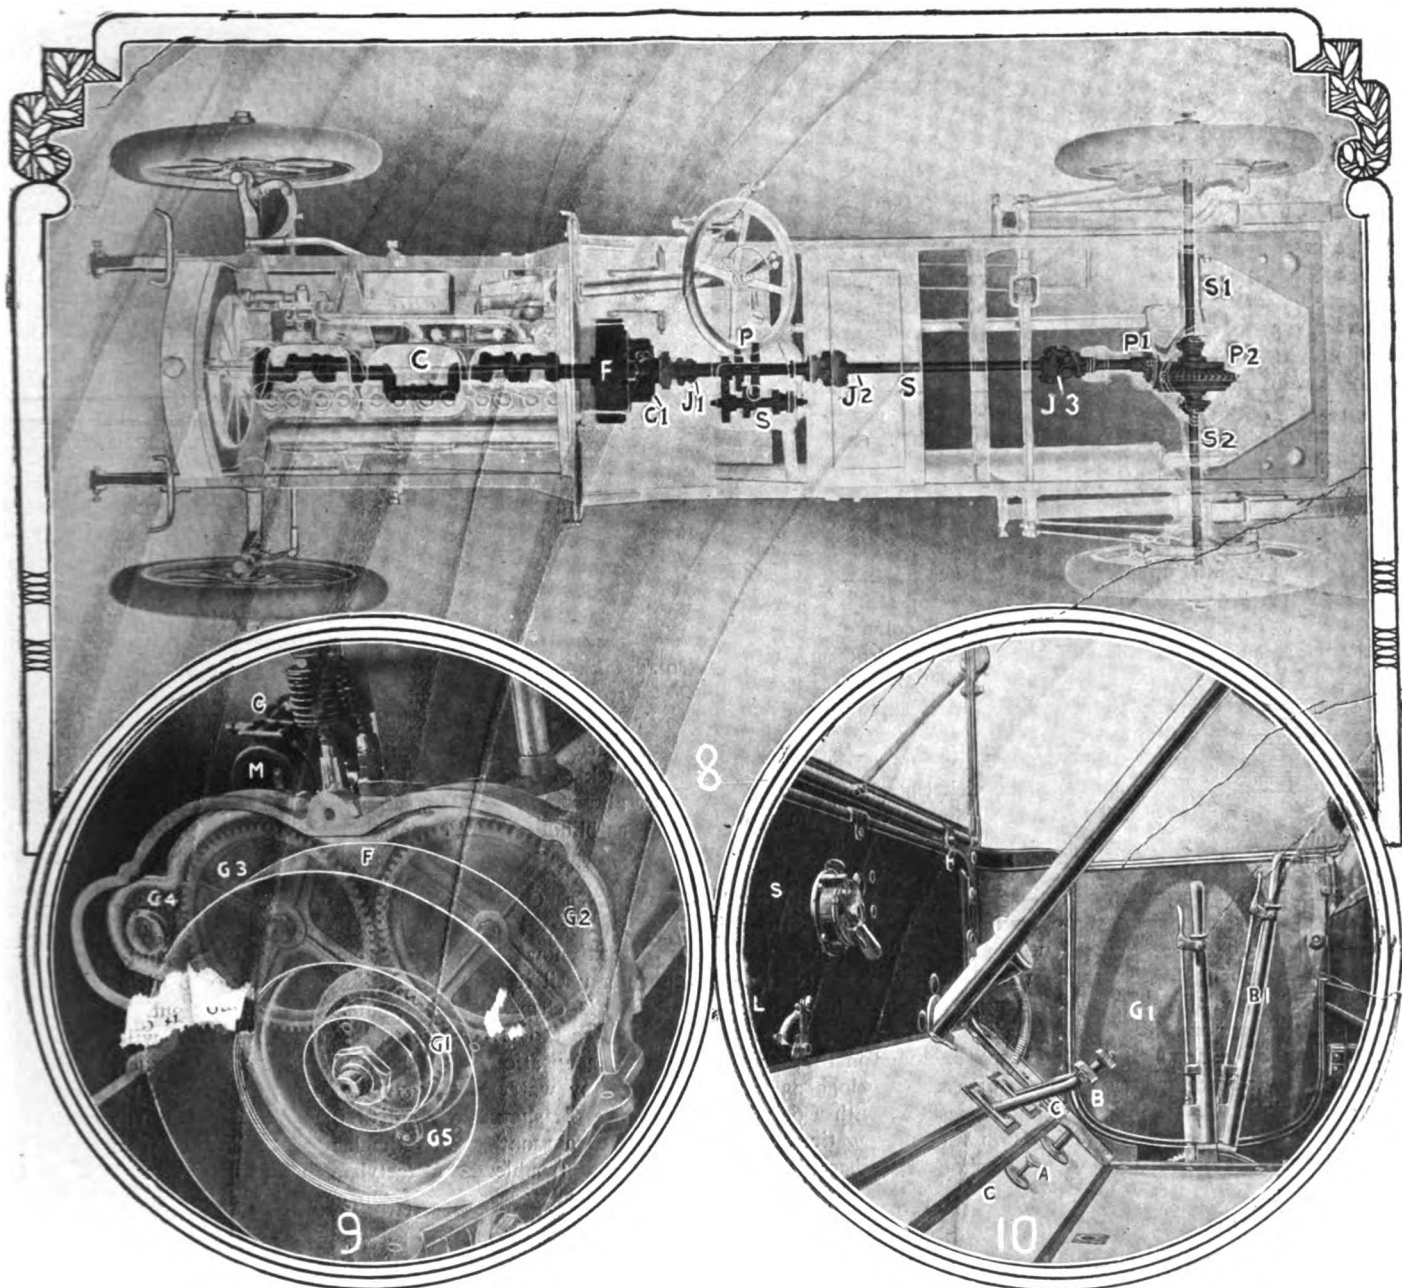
Silhouette view of the Model AA chassis showing the shafting employed in the drive. Fig. 9—Rear view of the motor through the flywheel showing the timing gears and the magneto. Fig. 10—General view of the front compartment showing the dash fittings, pedals and levers
